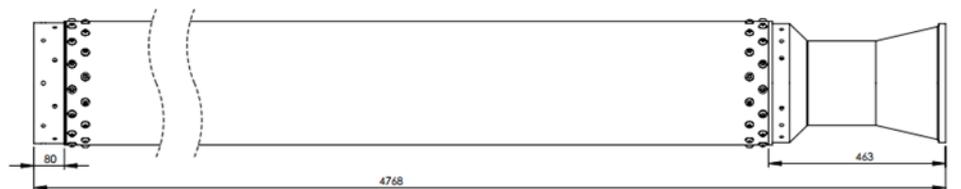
Technical Drawing of Rocket Motor of RX320
